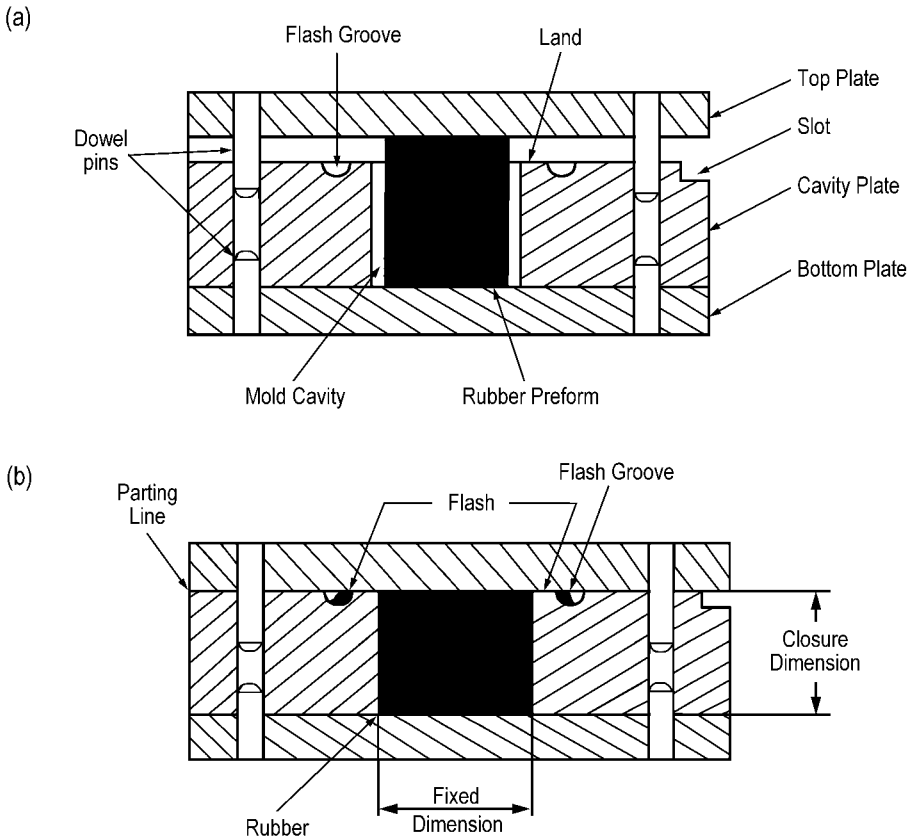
Compression mold containing a rubber preform (a) before closing molding, and (b) after mold closing (courtesy of J. Sommer and Rubber Division ACS [4])
